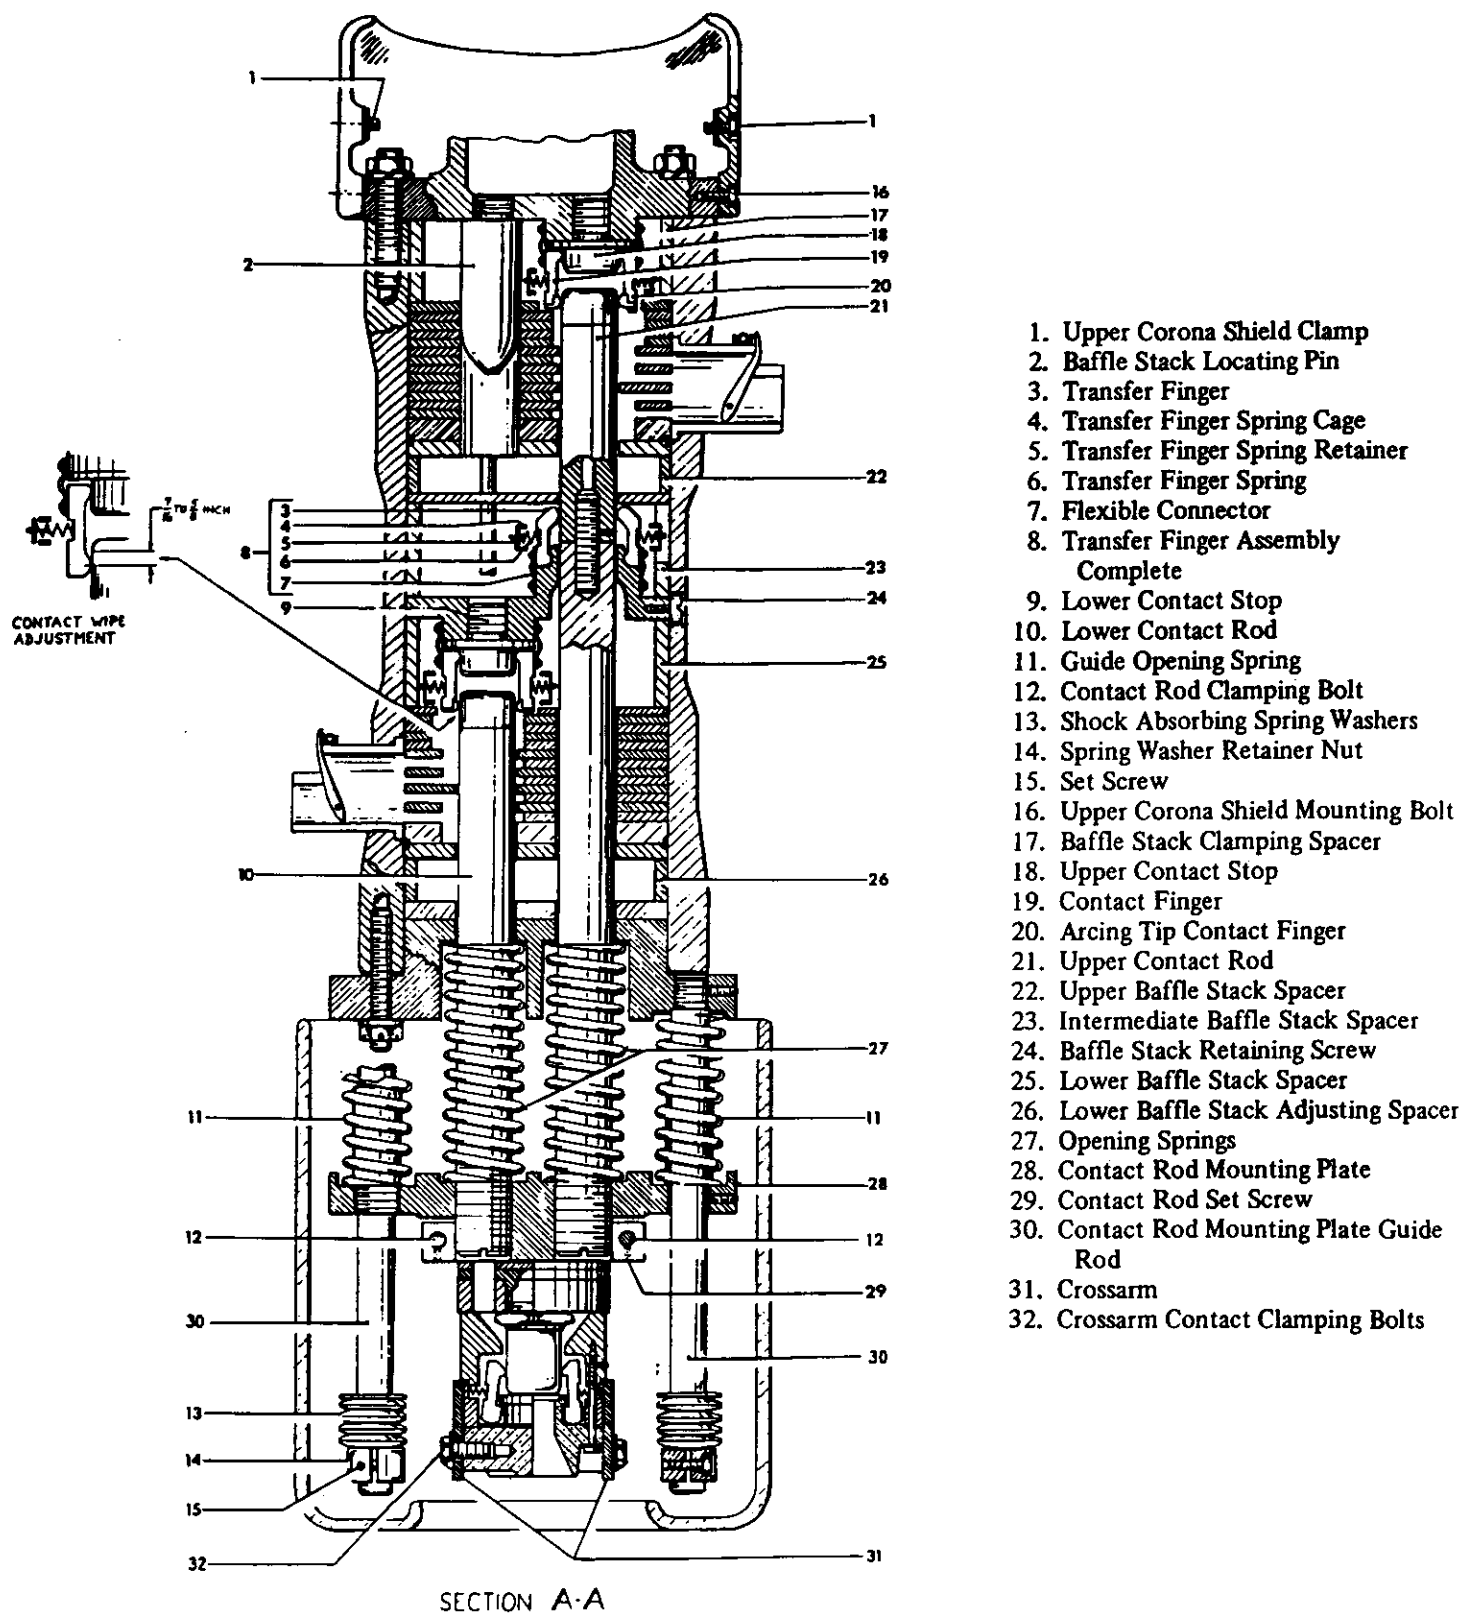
Side View of Interrupter – FK 121/145/169 – Nominal 10,000 mva
